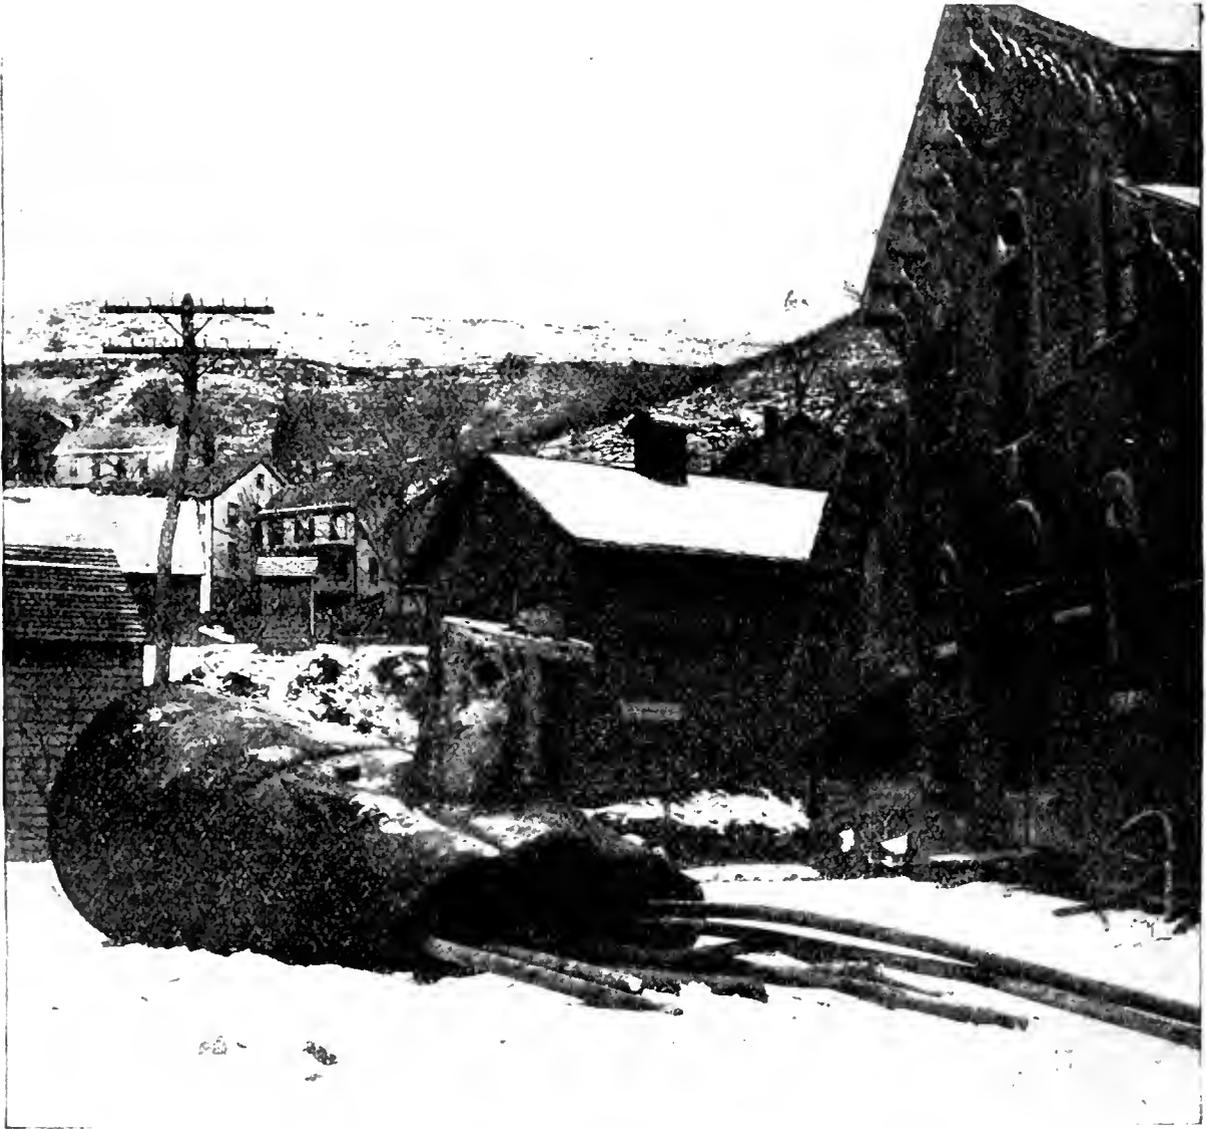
FORWARD PART OF THE BOILER, AFTER THE EXPLOSION.
